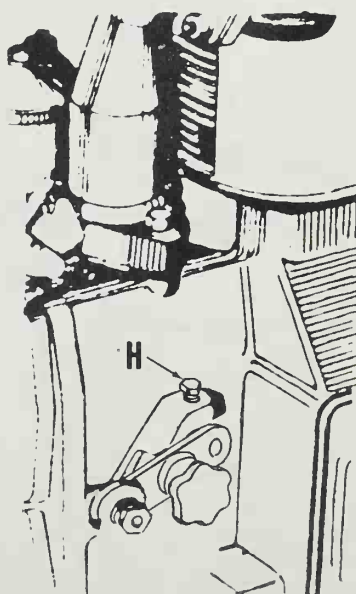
High speed on variable speed engines is adjusted by turning adjusting screw (H).
